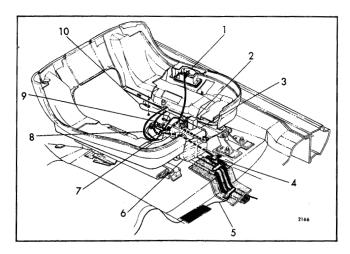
Four-Way Strato Bucket Seat Wiring "A & B" Styles
